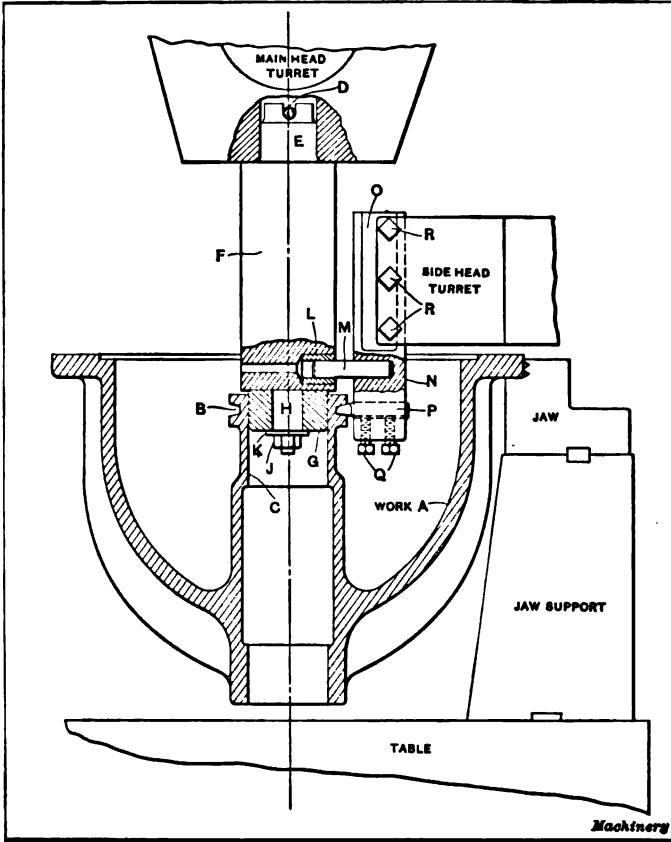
An Arrangement for cutting a Groove on the Outside of a Sleeve
